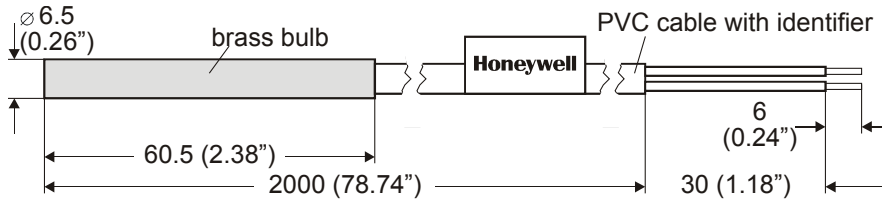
Dimensions of the cable-type bulb sensor in mm (inches)
